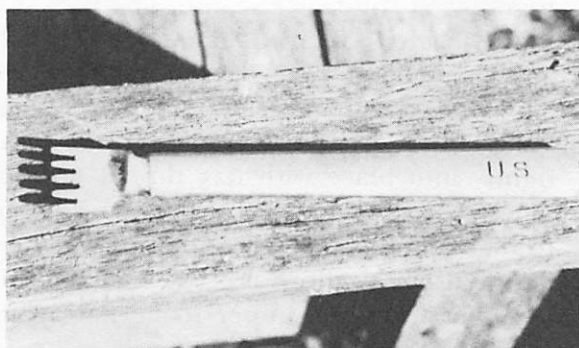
A lacing tool Willie made from a dinner knife. The tool punches holes in the leather for stitching.
